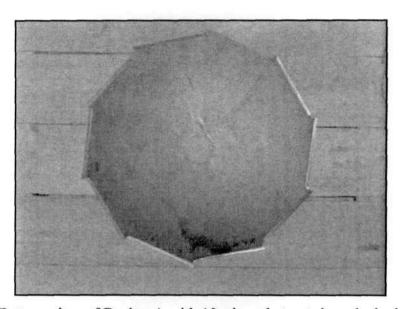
Bottom view of Design A with 10 edges that cuts in a clockwise direction
